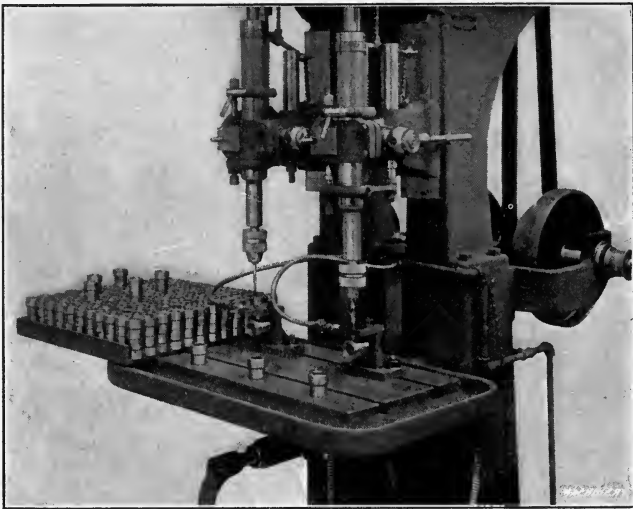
Ball-bearing Sensitive Drilling Machine set up for Use in Drilling Steel Bushings. On this Operation the Production is 10,000 Bushings in a Ten-hour Day
